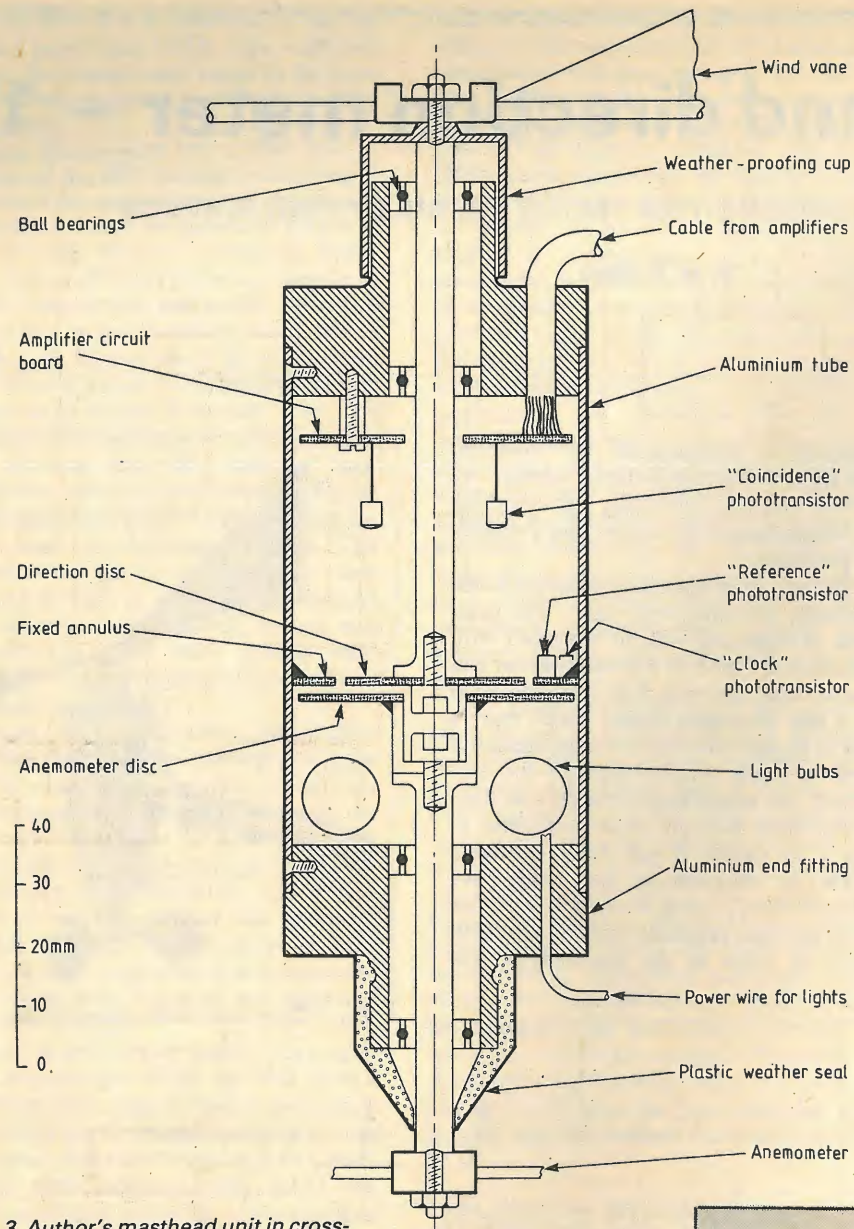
Author's masthead unit in cross-section. Dimensions may be arranged to suit materials and components to hand.
